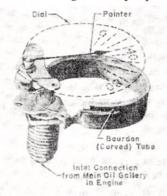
Typical Pressure Expansion Type Oil Pressure Gauge (Courtesy Stewart-Warner Corporation)
